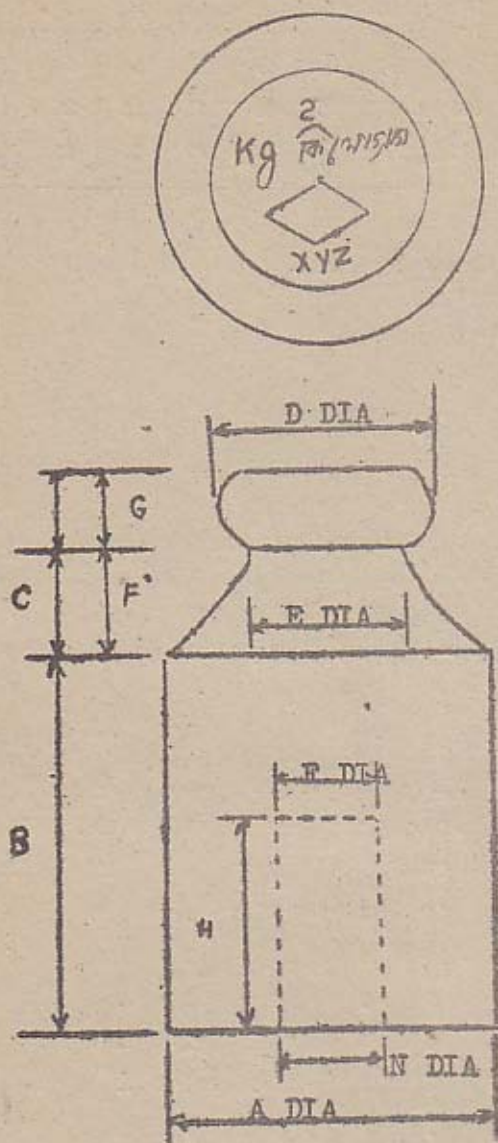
CYLINDRICAL BULLION WEIGHT WITH KNOB.
